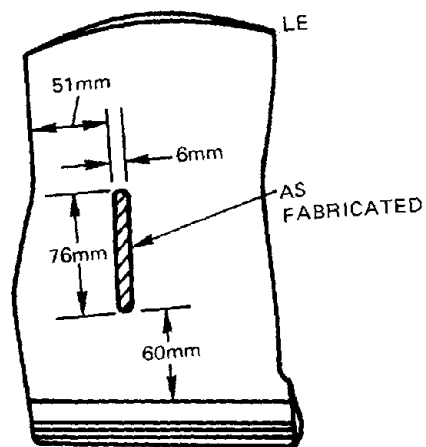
Blade Inspection Results; Blade Serial No. T-2, as Fabricated.
